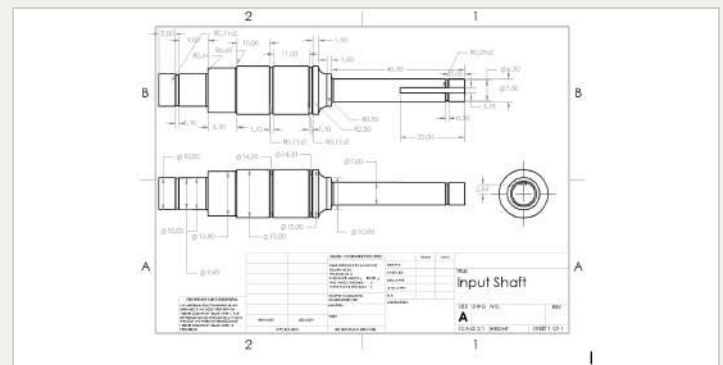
DRAWING Manufacturing-ready input shaft – dimensions, tolerances, keyway
